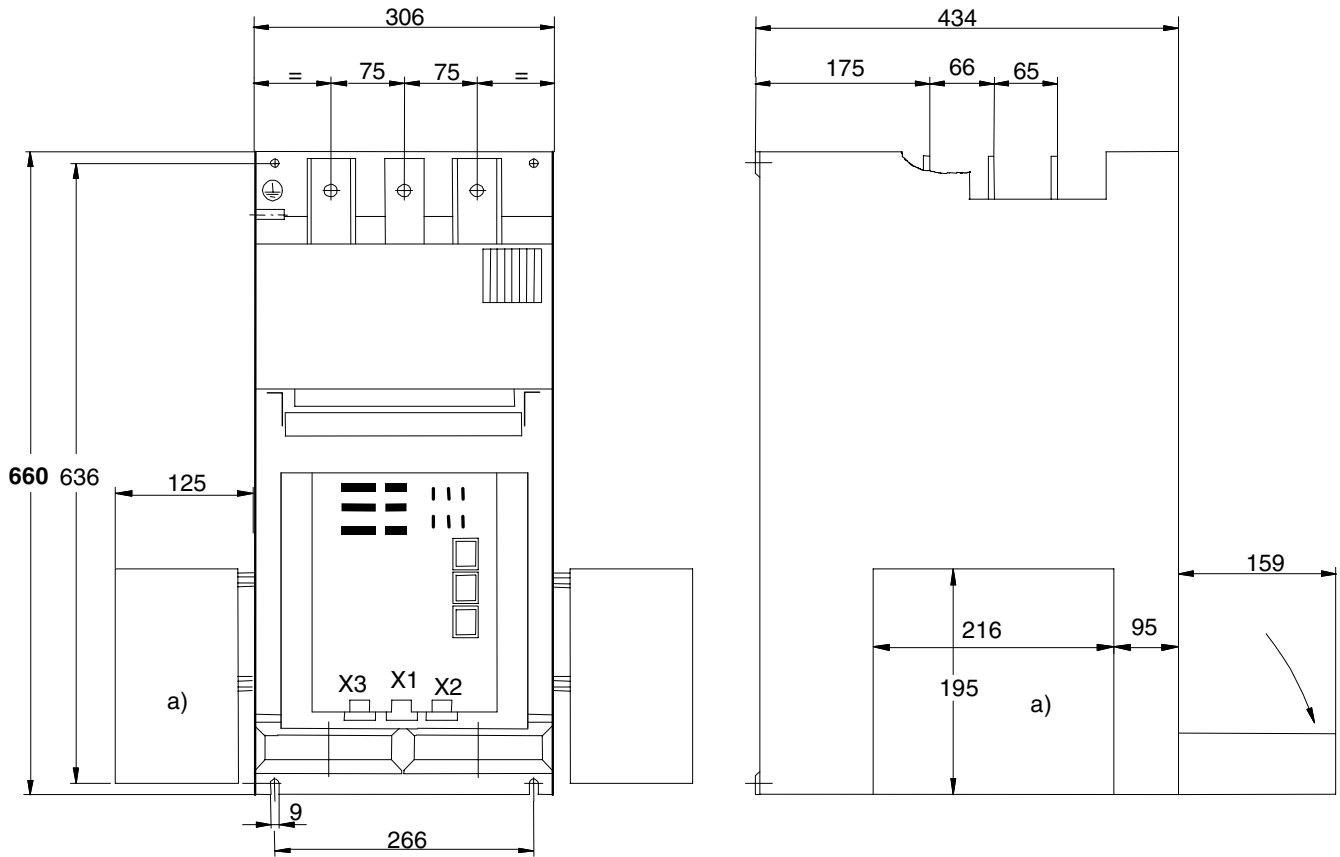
Dimensions, weight and drilling plan for Type 60A and 120A
